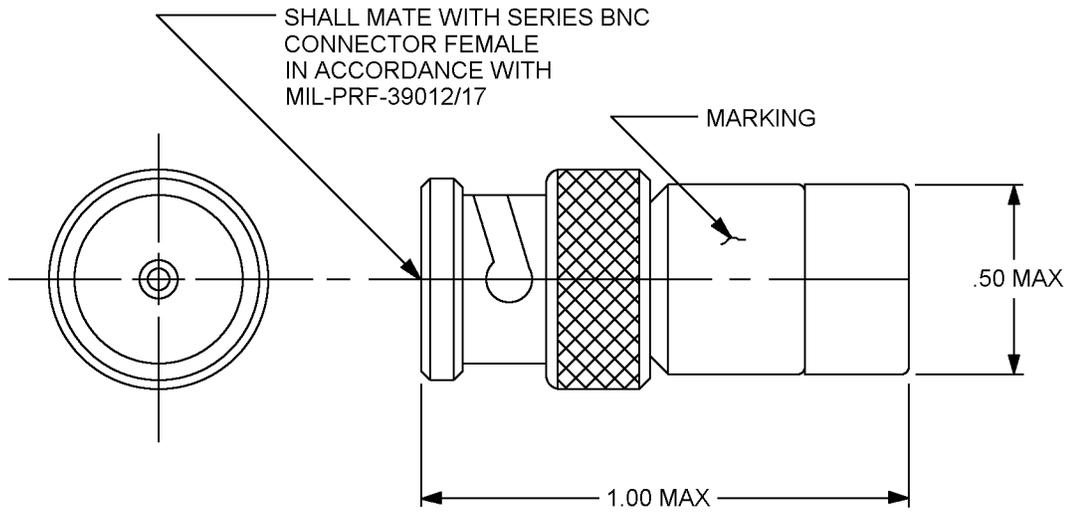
Dimensions and configuration, PINs M39030/7-01, -02, -03, and -04.
